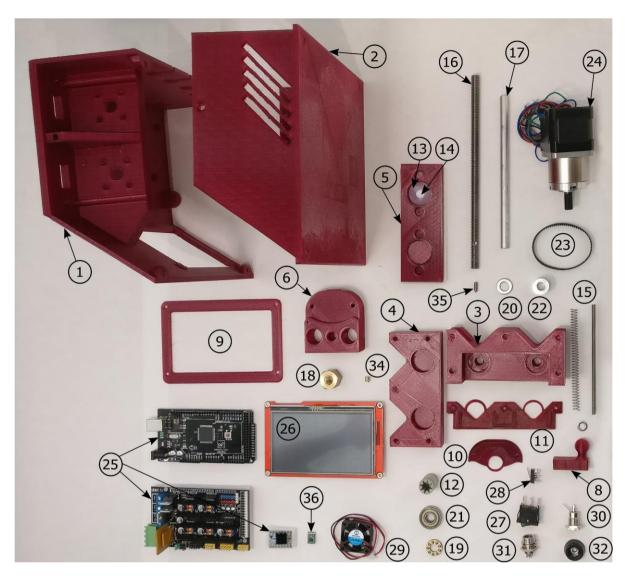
All 3D-printed, mechanical, and electronic parts with numbers.
